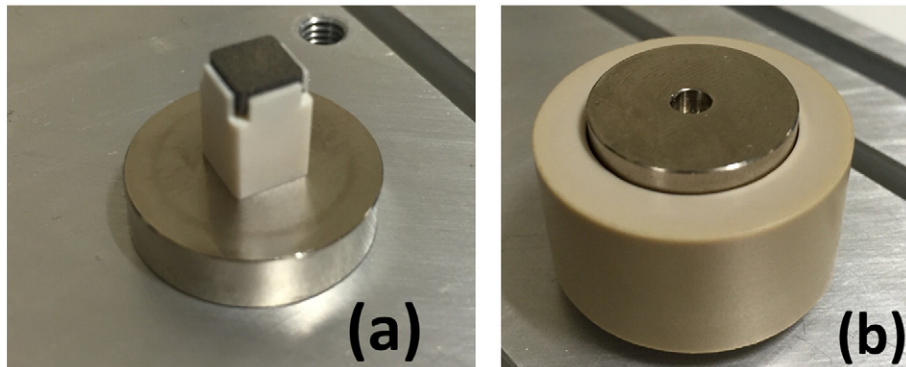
Assembly of the prototype (a) without the external case (b) with the external case.
